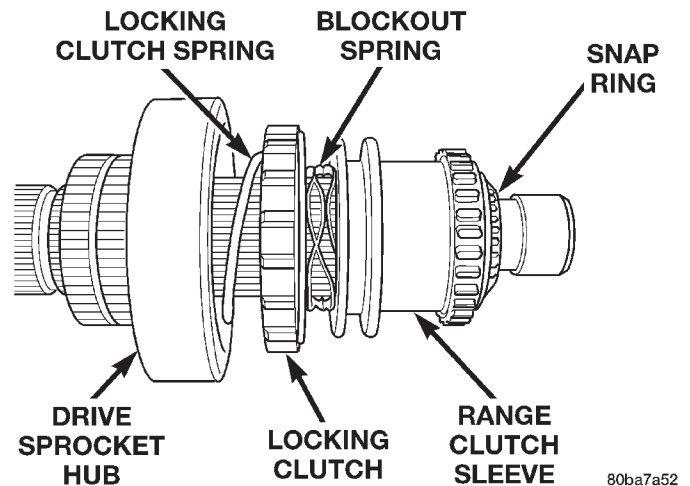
Range Clutch Sleeve, Blockout Spring, Locking Clutch and Spring
